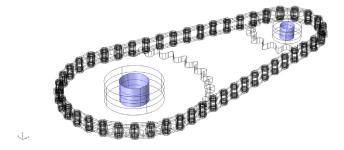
The Sprocket Inner Boundaries selection for creating attachments and hinge joints to mount the sprockets onto shafts.
